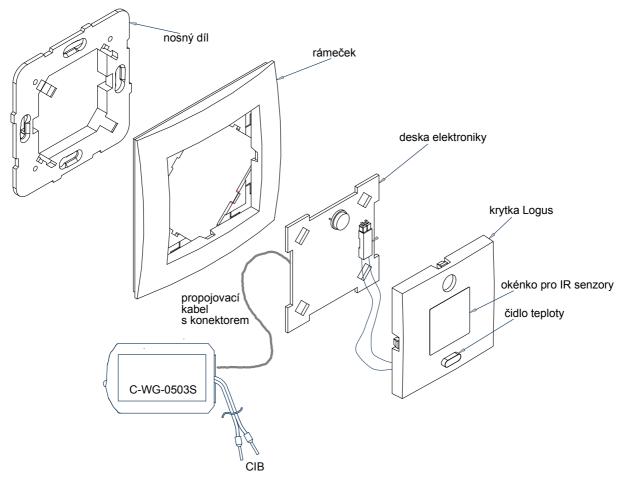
The C-RI-0401R-design module assembly
